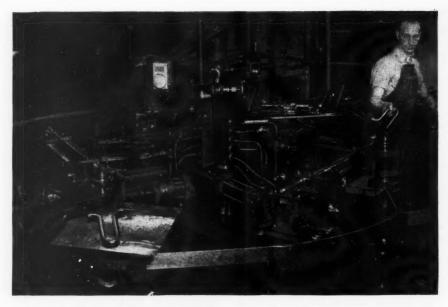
Hydraulic automatic rotary U-tube bending machine in operation.
